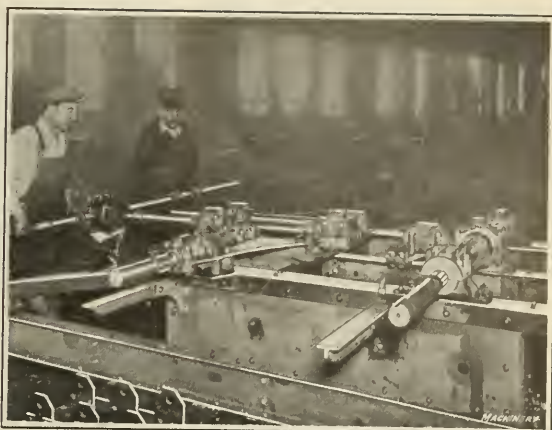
Power Reamer for reaming Bearings on 75-horsepower Tractor
